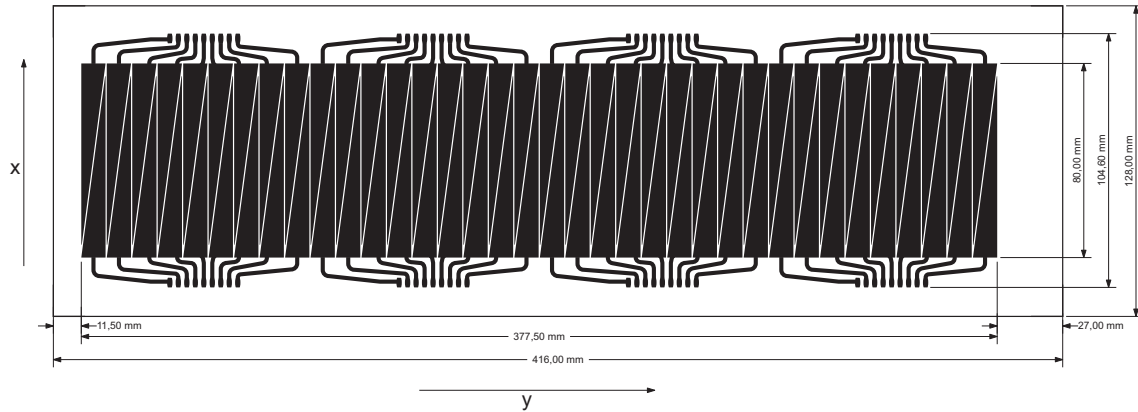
Drawing of the pad plane of real-size prototypes.
